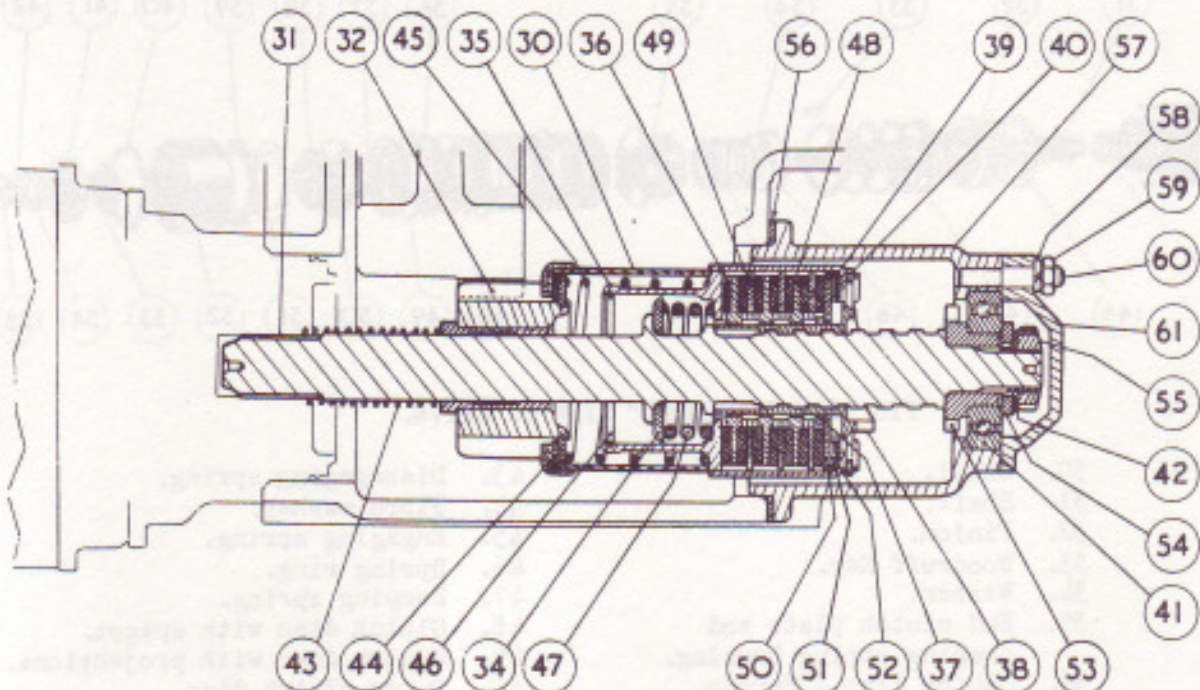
SECTION THROUGH DRIVE IN ENGAGED POSITION. (A Vellumoid washer is fitted each side of the packing piece 56 on late chassis.)
